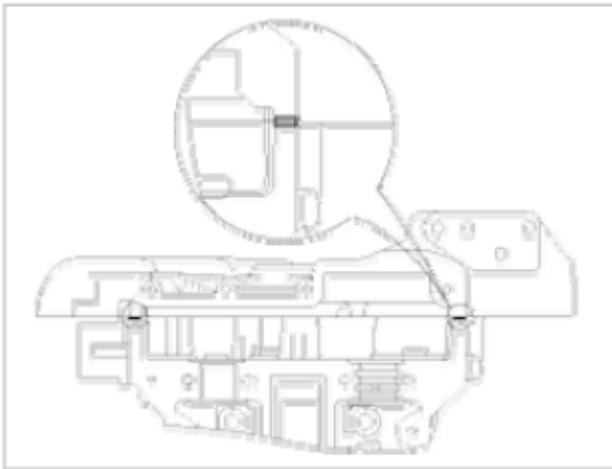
Identifying Hardening Sealant Located On Upper Area Between Timing Chain Cover And Cylinder Head
